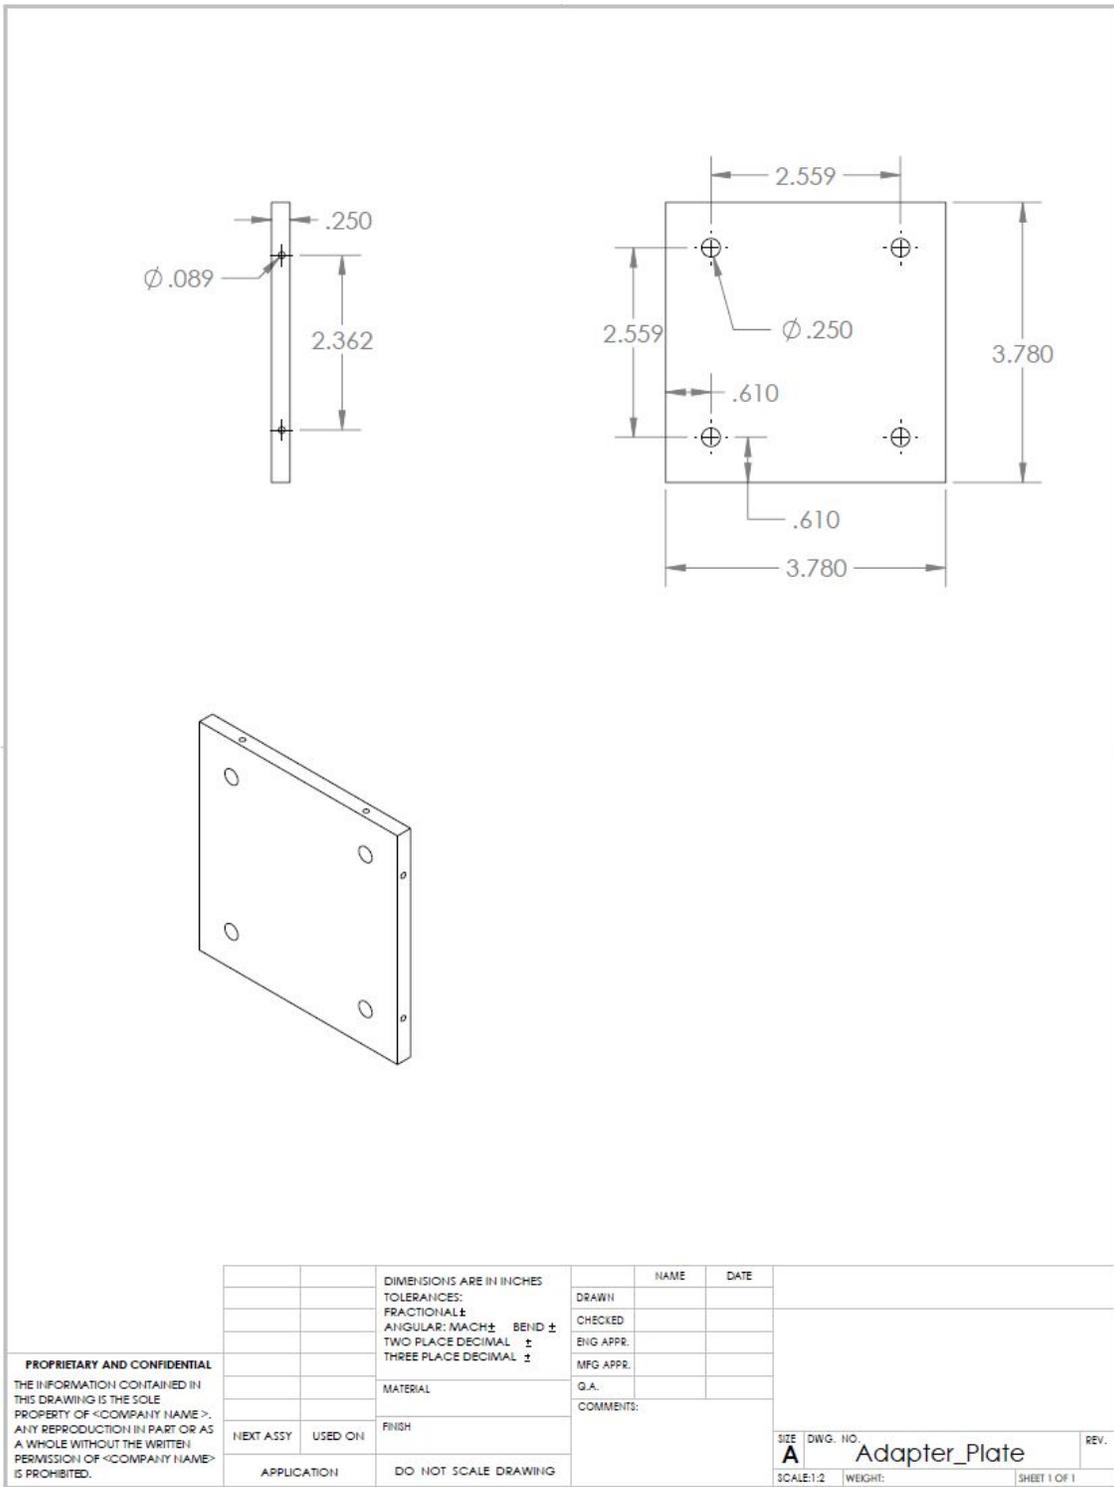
Mechanical drawing of the MURI shell adapter plate that will attach to the HASP plate.
